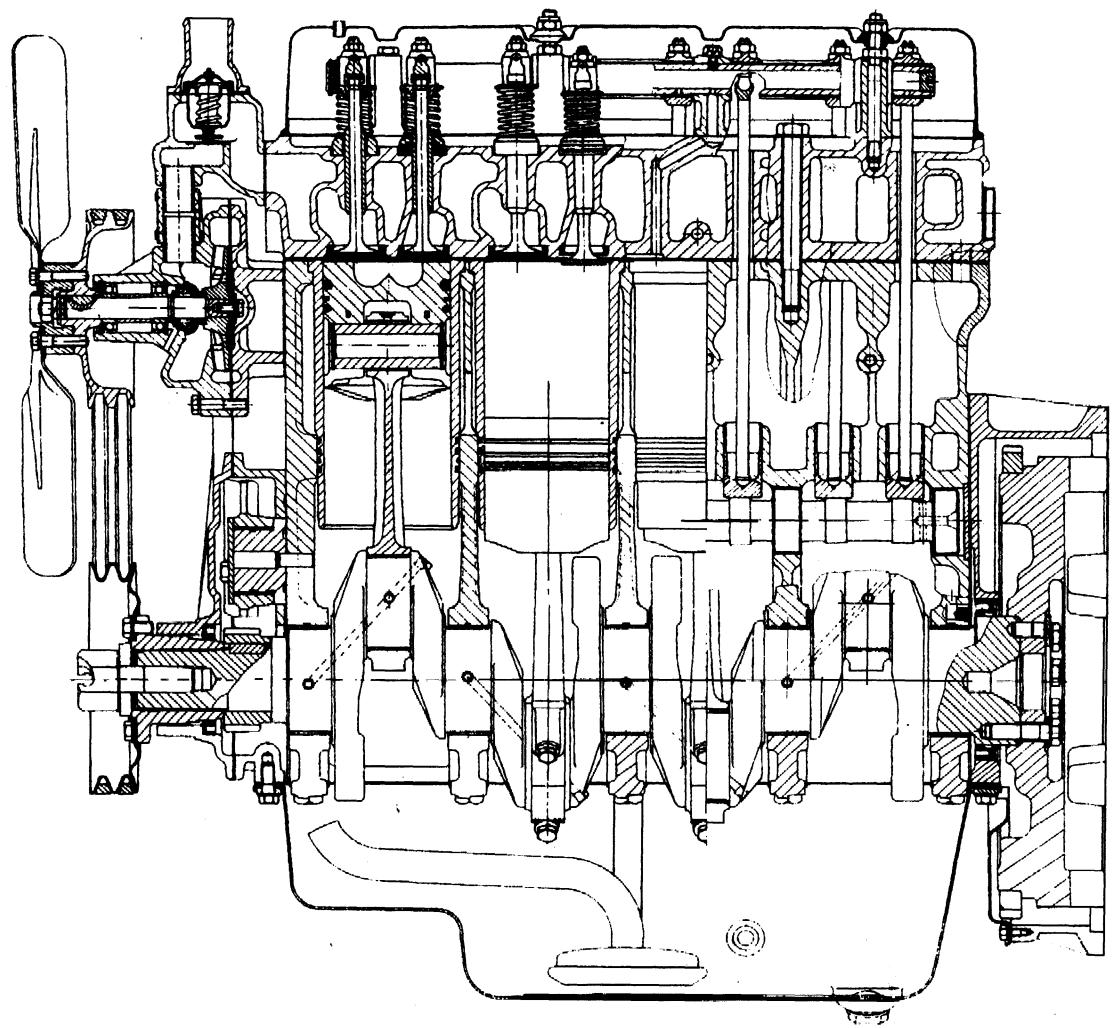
Longitudinal sectional drawing for R4100, R4105 diesel engine
